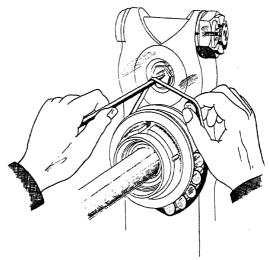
Showing method of assembling bearing rollers and retaining in position with rubber band.
